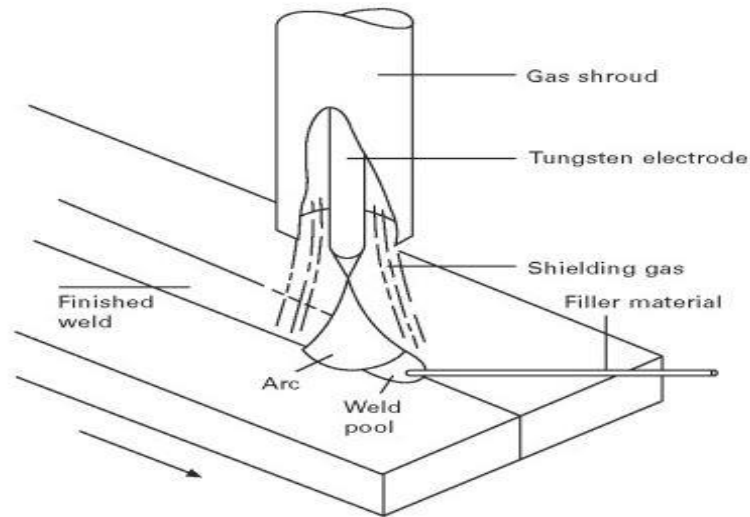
Welding of gas tungsten arc process [37]
